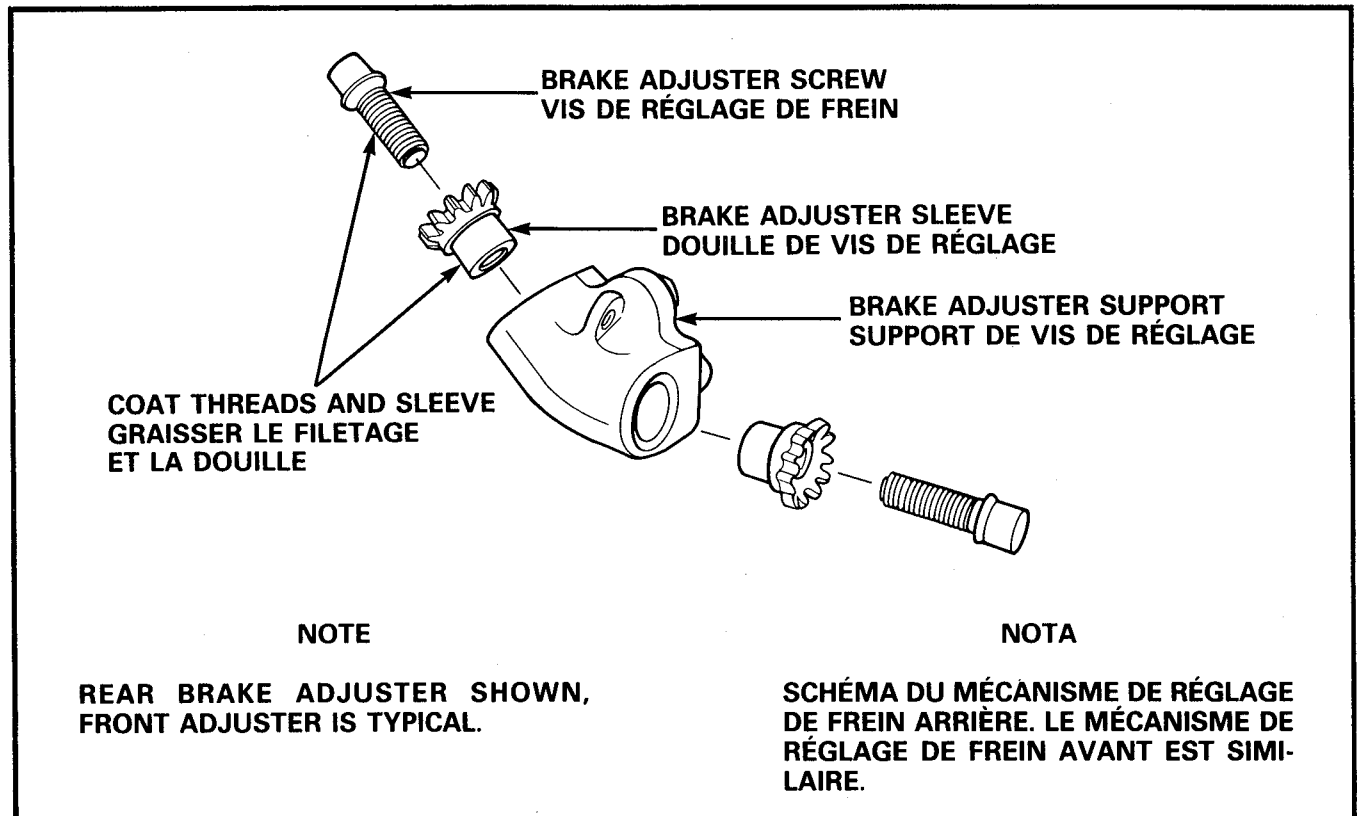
Exploded View of Rear Brake Shoe Adjuster
